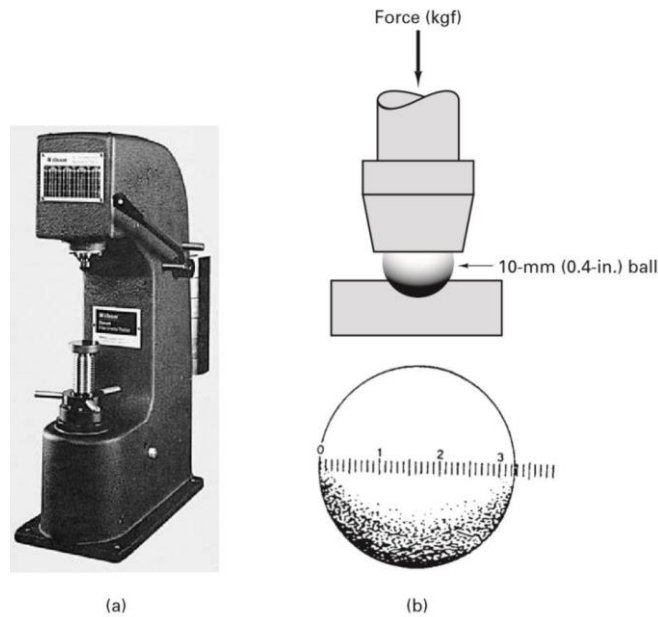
(a) Brinell hardness tester; (b) Brinell test sequence showing loading and measurement of the indentation under magnification with a scale calibrated in millimeters.
